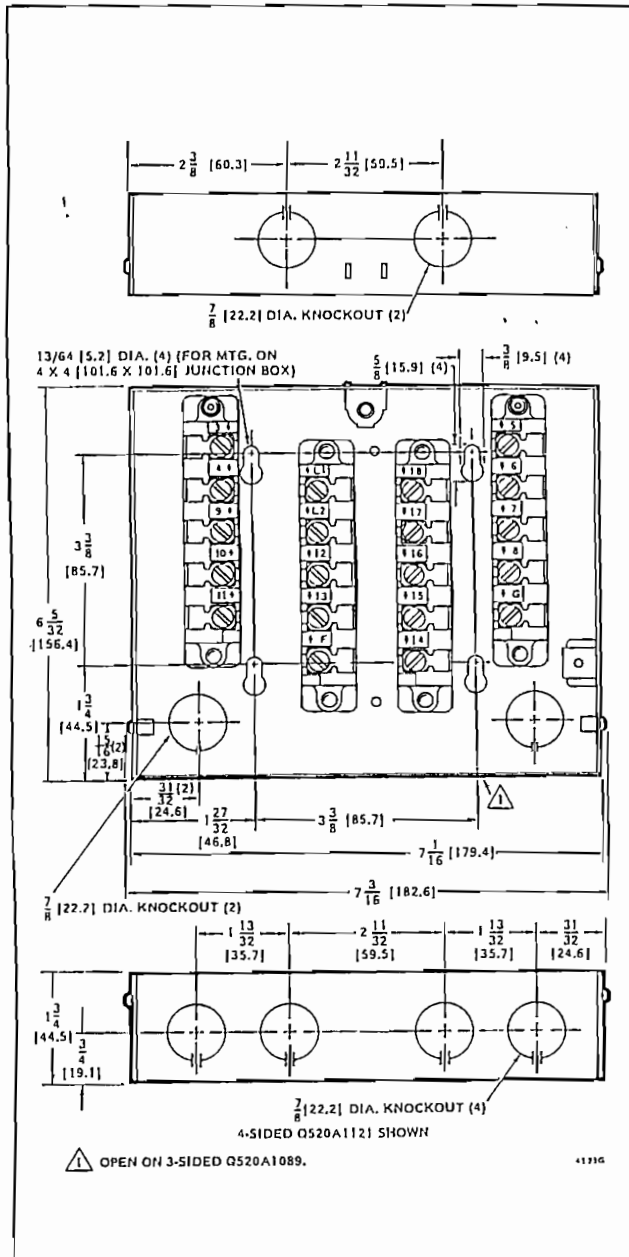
MOUNTING DIMENSIONS OF THE Q520A WIRING SUBBASE, IN in. [mm SHOWN IN BRACKETS].
